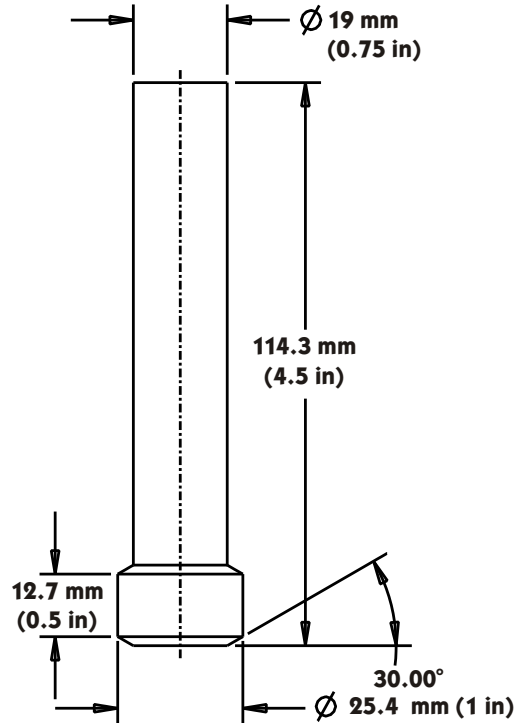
Drawing of the friction tool; tool made of 1018 steel.
